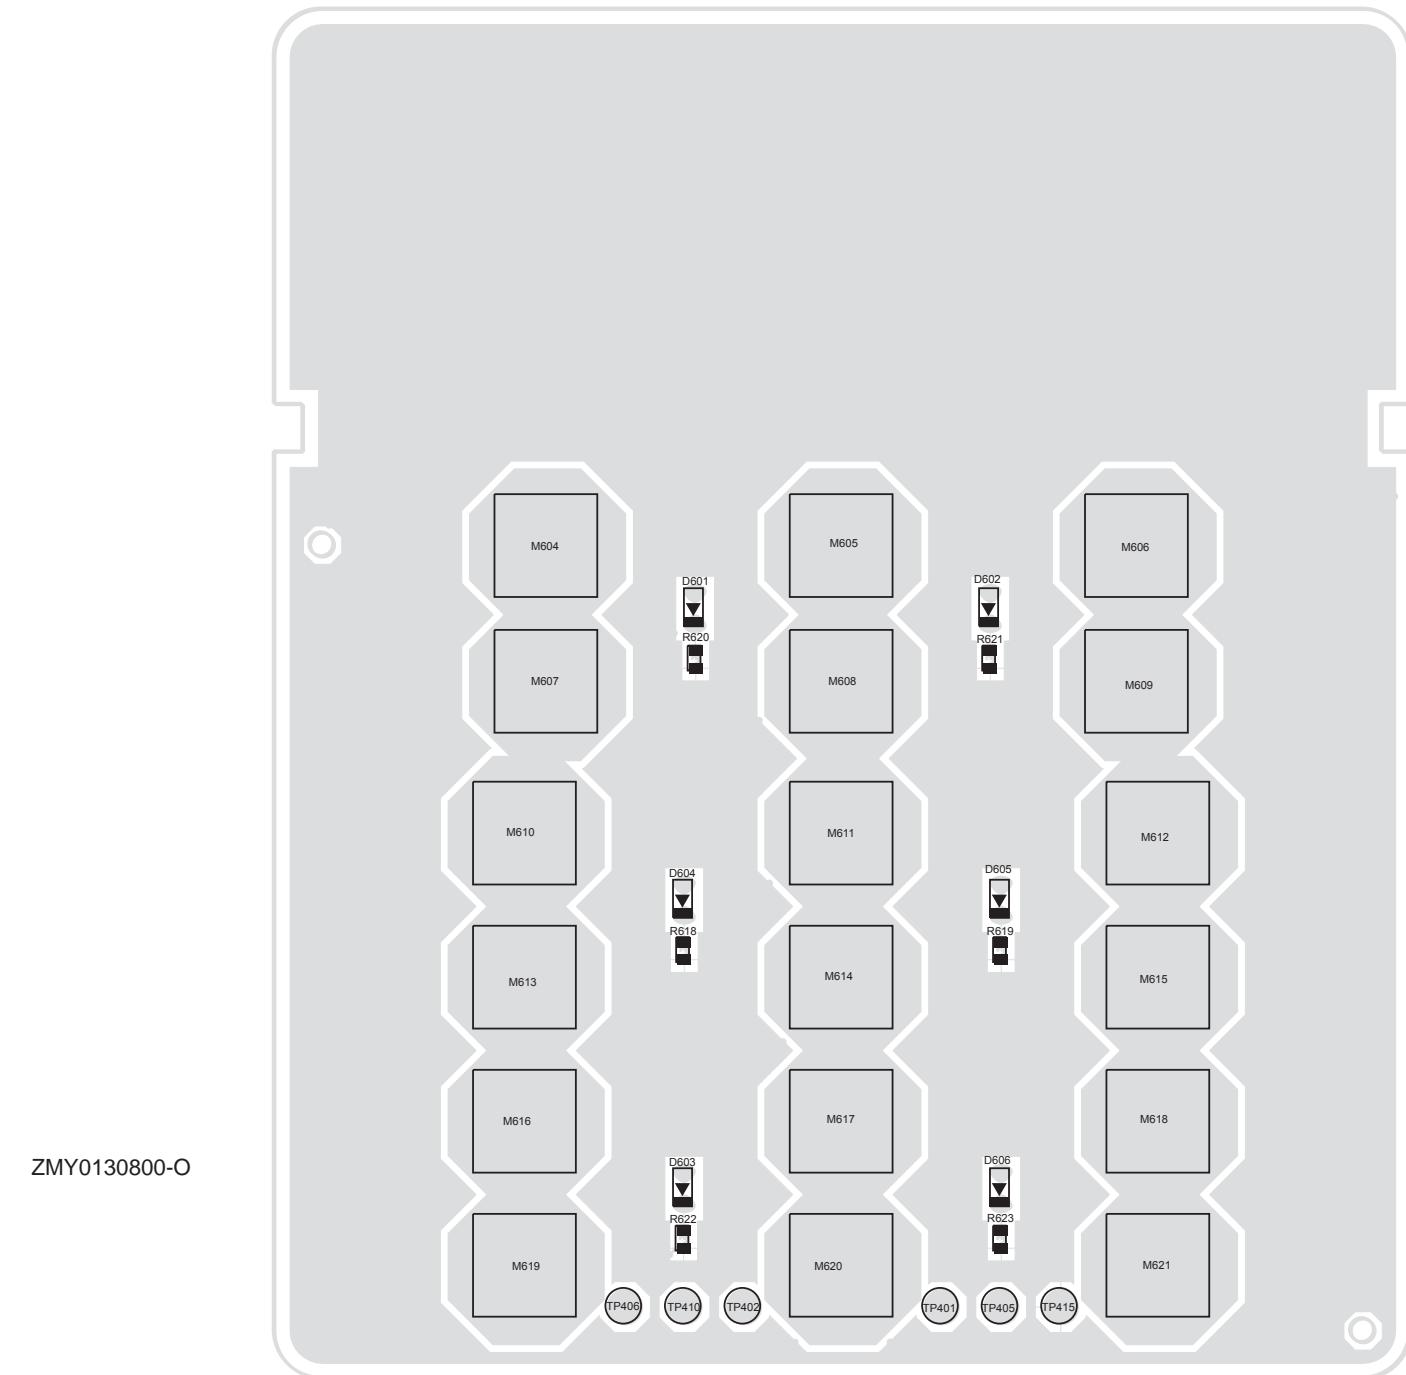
Controller Board Top View for VHF & UHF1 (PCB No. 8404051G01)
